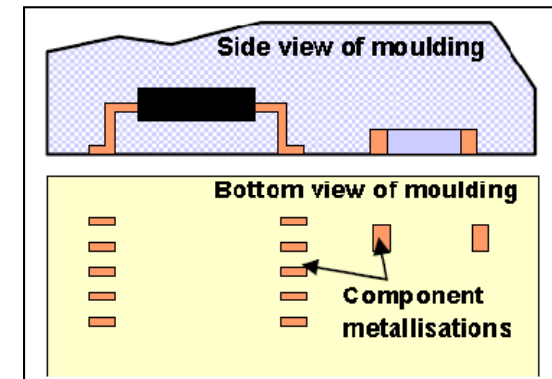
Removal of carrier film, revealing component metallisation on underside of moulding.
